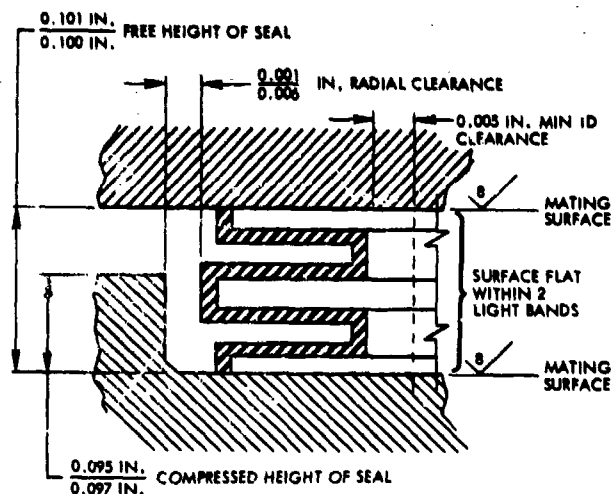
Typical Flexible Metallic Seal Installation Requirements
